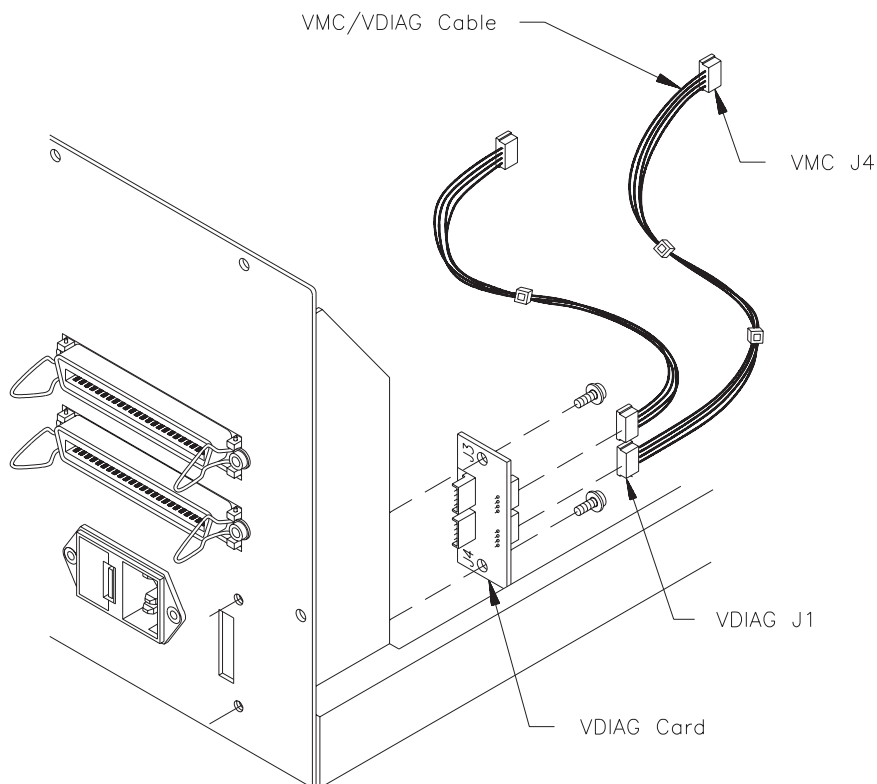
VMC/VDIAG cable (card and cable removed)
